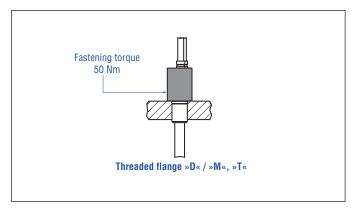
Mounting example of threaded flange »D« / M« & »T«
